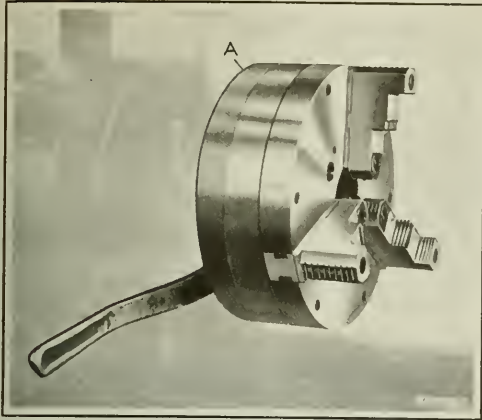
Differential-g geared Scroll Chuck designed by the E. Horton & Son Co.
